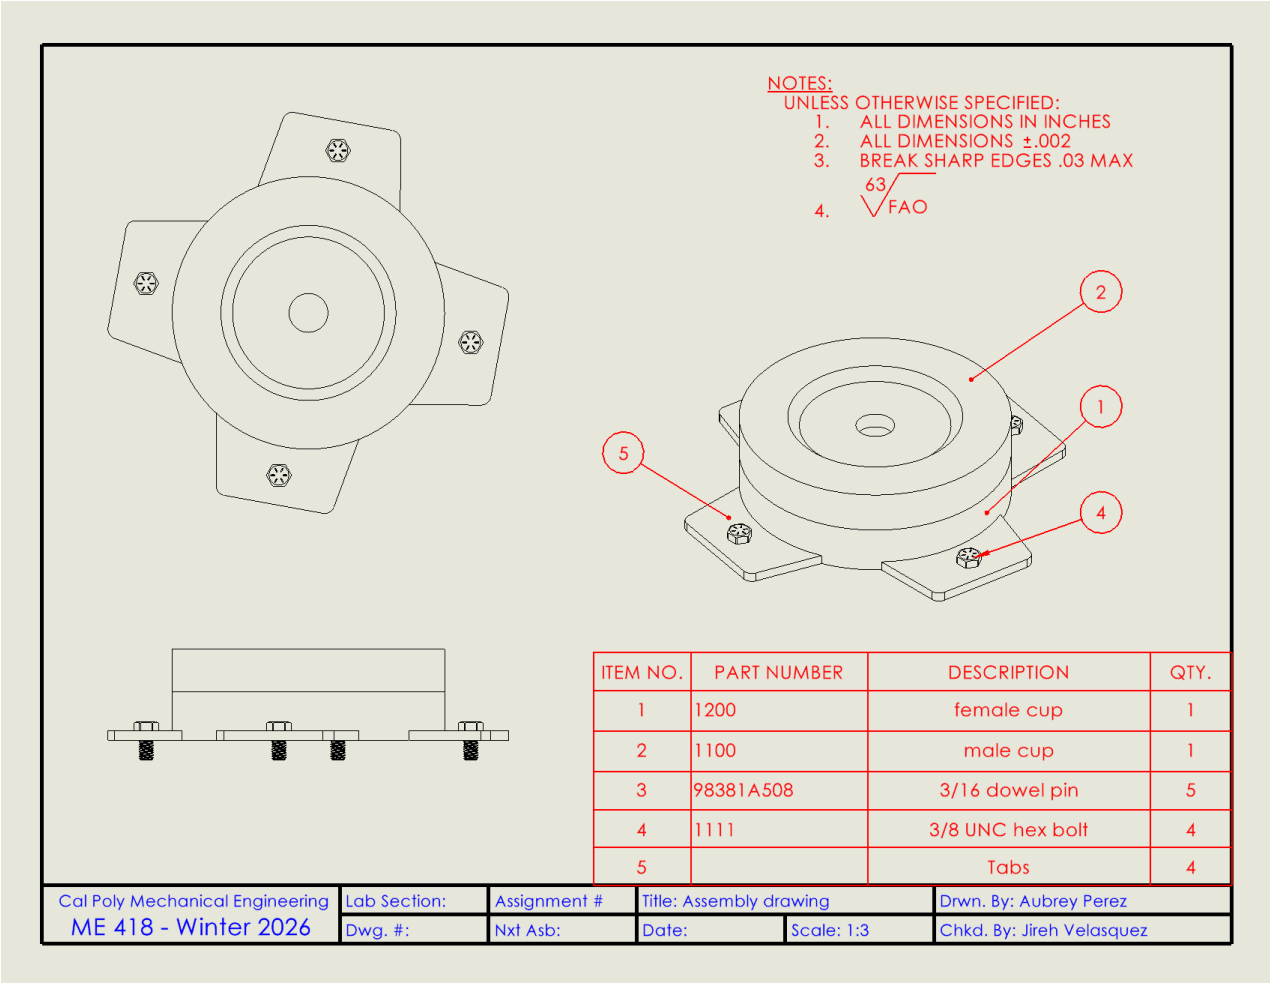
Full assembly drawing for assemblies 1000 and 2000
